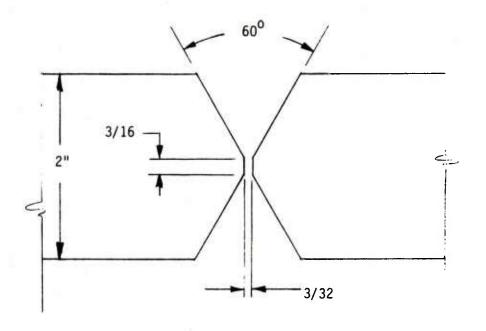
FULL PENETRATION WELD BEVEL
